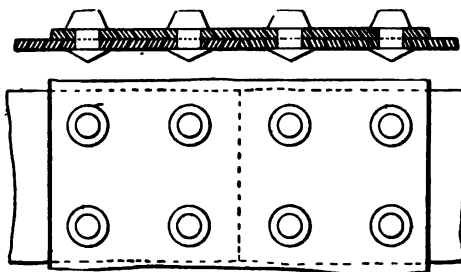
DOUBLE RIVETED SINGLE STRAP.
